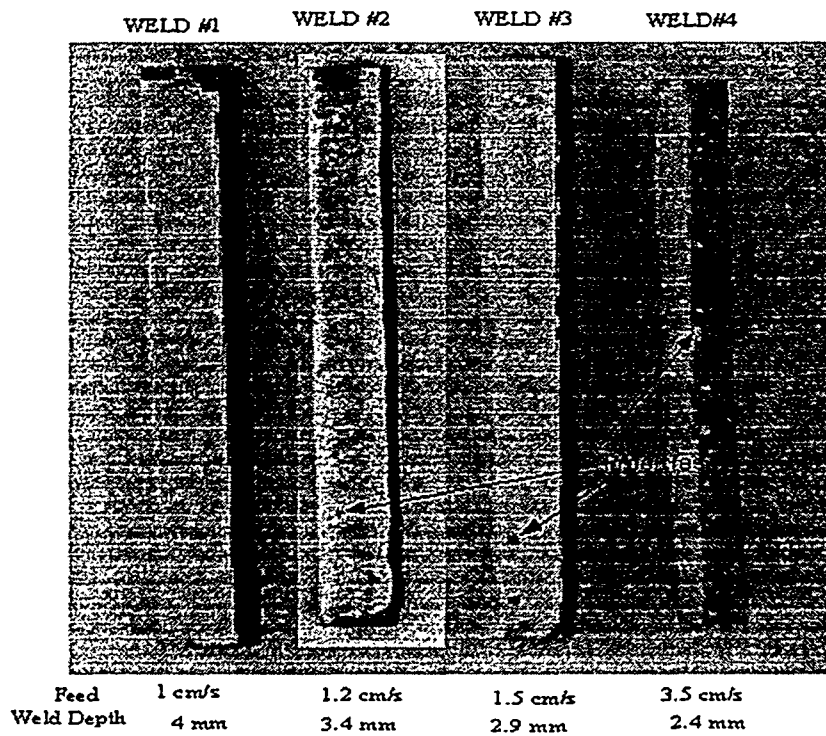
Longitudinal section views of laser-welded samples showing welds with porosity and a full penetration weld without porosity
